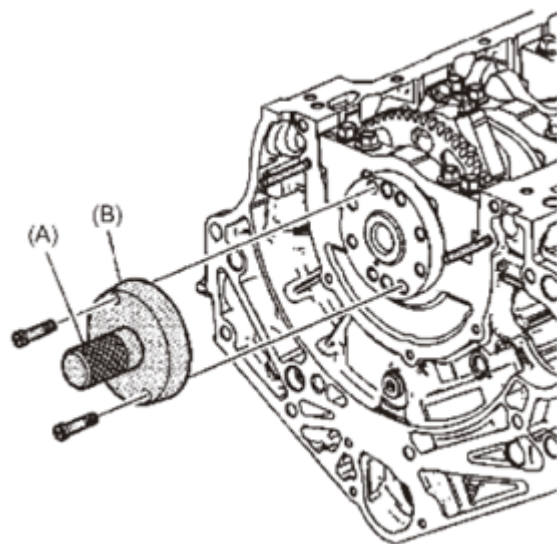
Identifying Engine Front Cover Installation Guide Pins
